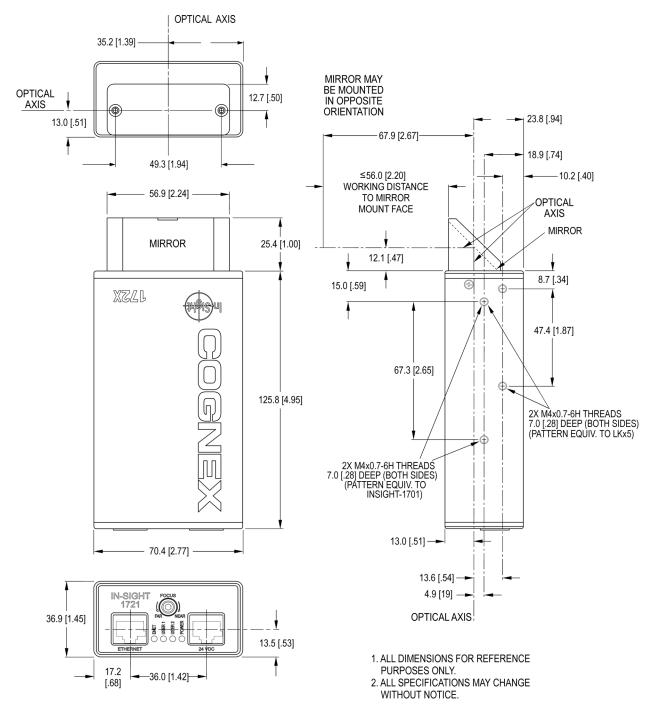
In-Sight 1720 Series Wafer Reader Dimensions with Horizontal Mirror Mount (Recommended Horizontal Configuration)
